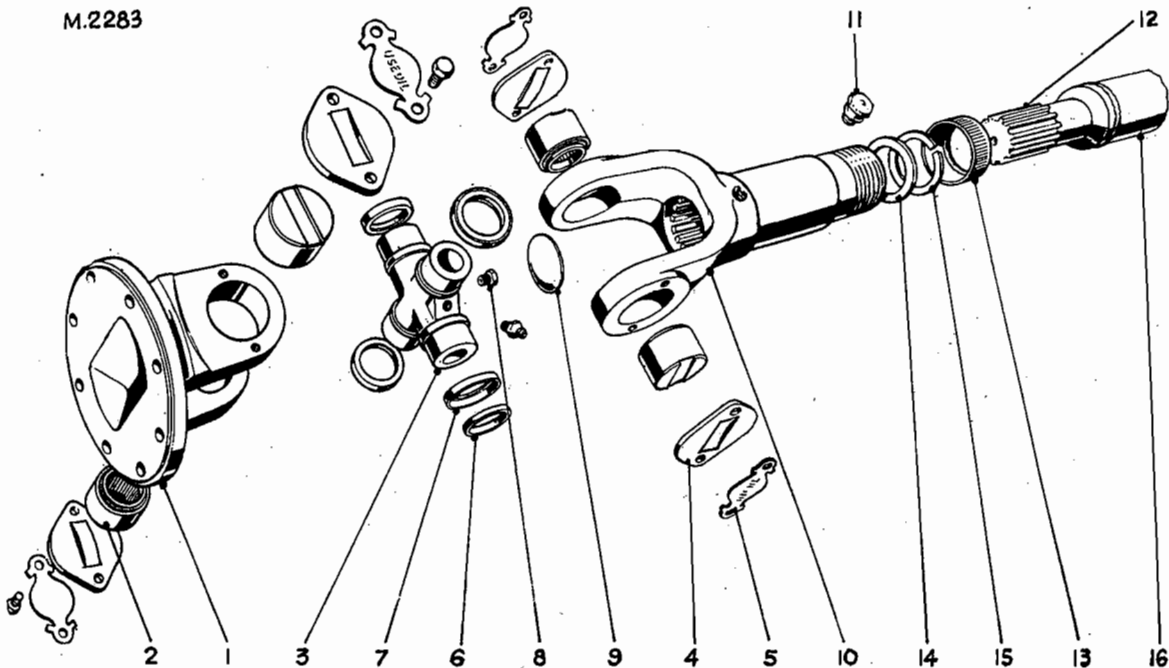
EXPLODED VIEW OF TYPICAL UNIVERSAL JOINT
